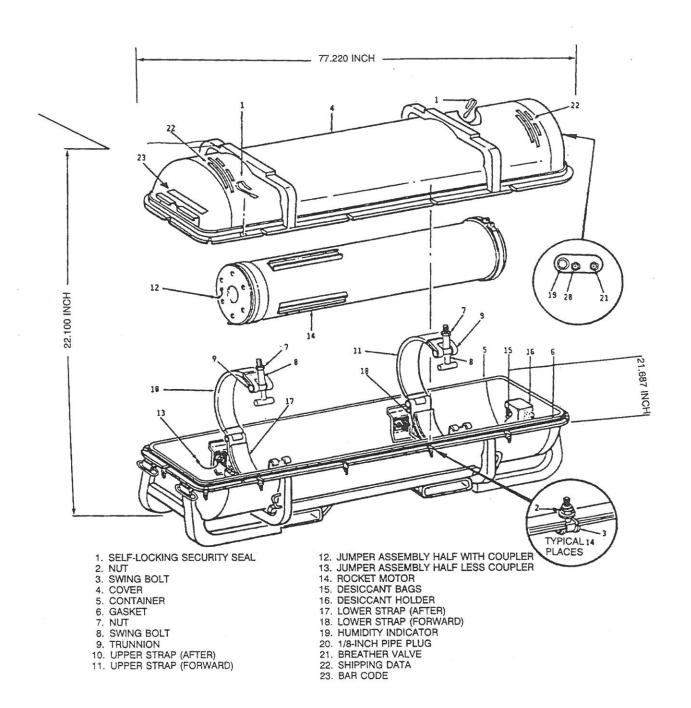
Packaging Condition of Rocket Motor Mark 37 in Container Mark 178, Exploded View
